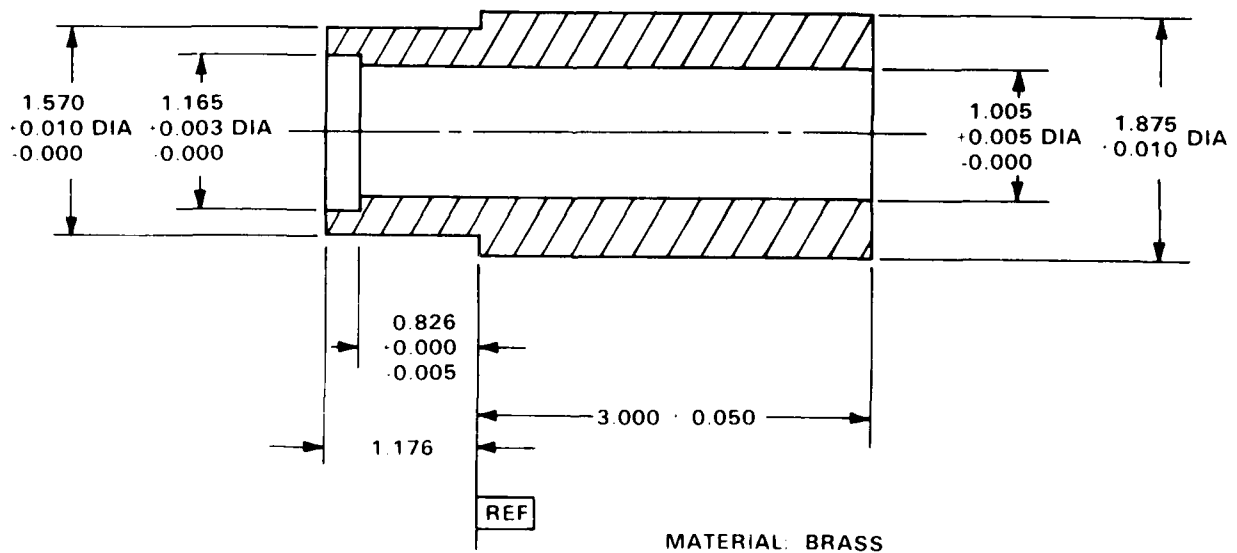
SCHEMATIC OF OUTER PART OF ULLAGE INSPECTION FIXTURE.
